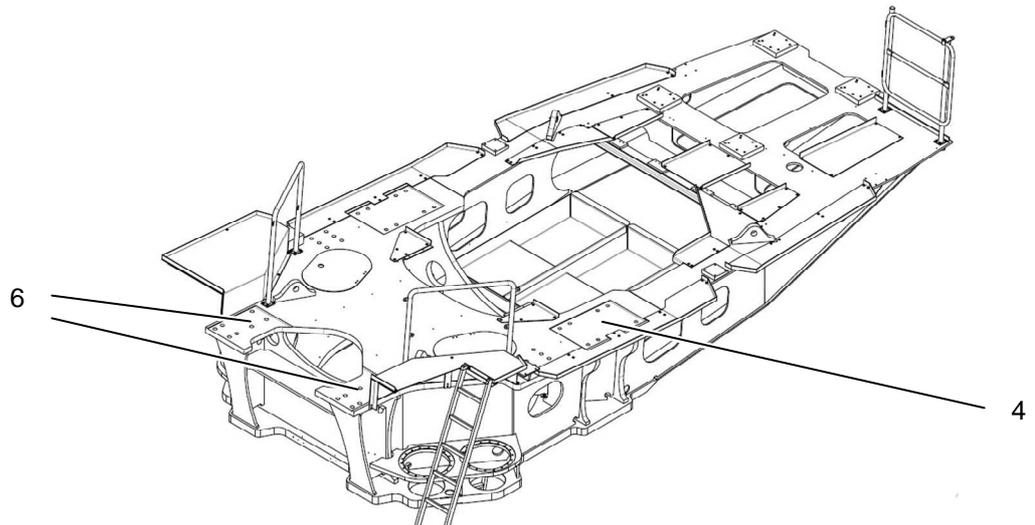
3 Machine base (without superstructural parts)
